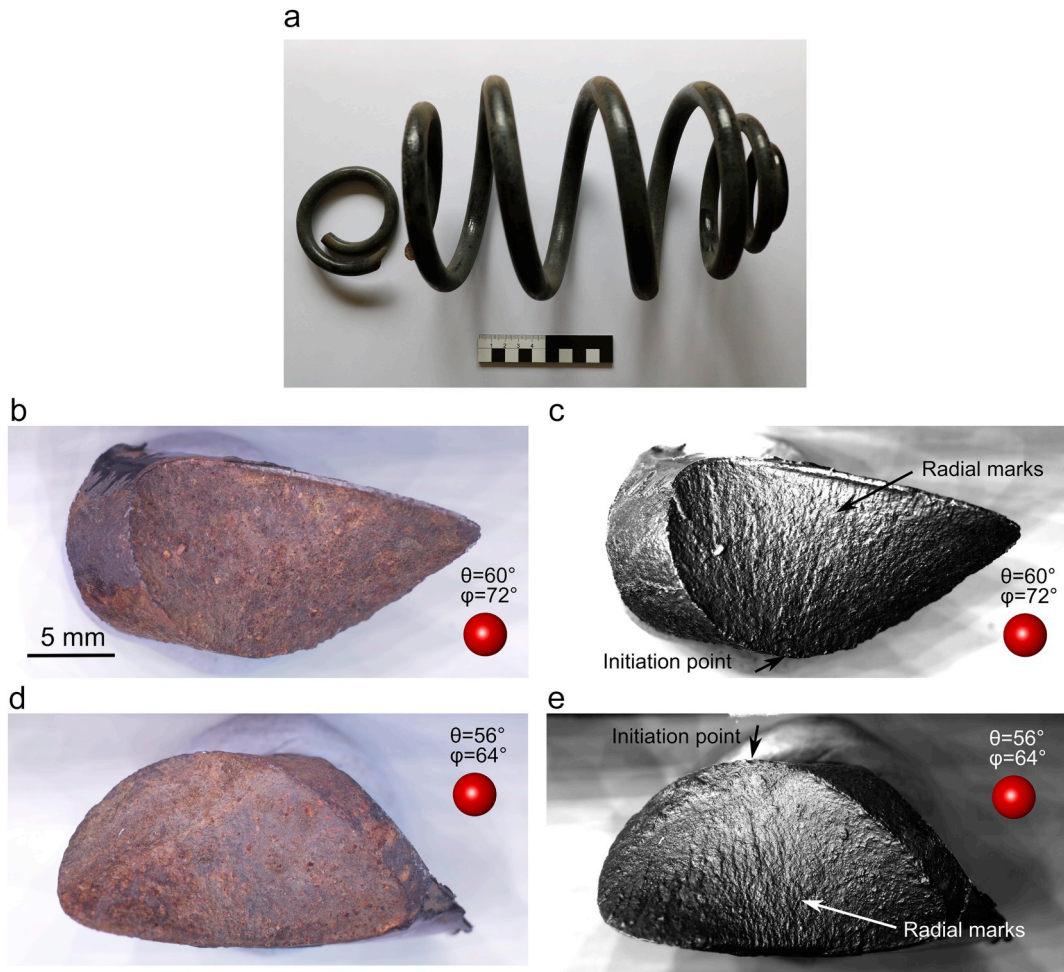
Oxidised fracture surfaces of a failed high-strength steel coil spring. a.) Complete component from which failure surface specimens were extracted. b,d) Macrographs of both sides of the failure surface. c,e.) Macrographs with specular enhancement. Linear marks on both fracture surfaces radiate out from the fracture origin.
